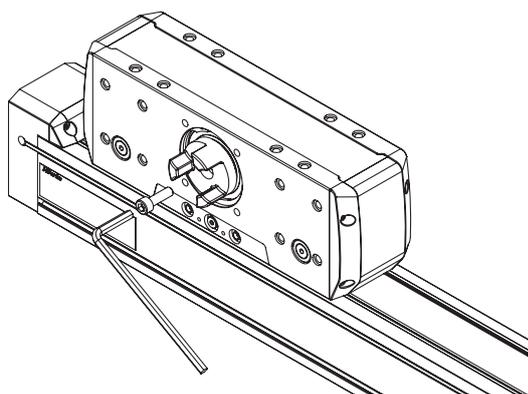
Mounting the expansion hub by tightening the expanding mandrel
